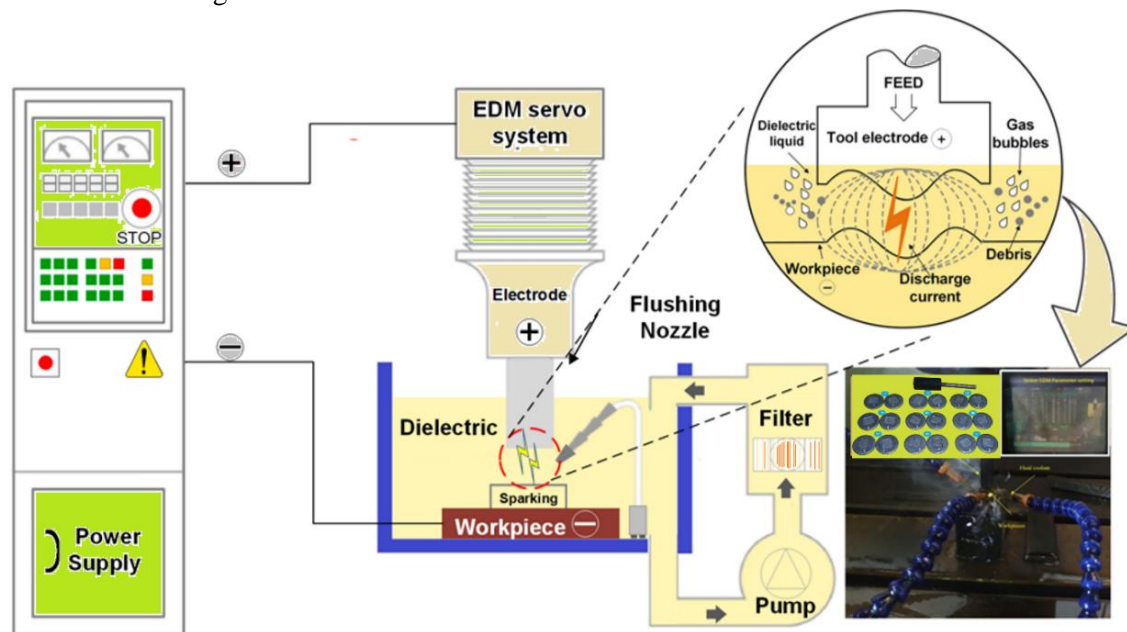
Schematic of sinker-EDM in C-TEK ZNC-50A machine.
